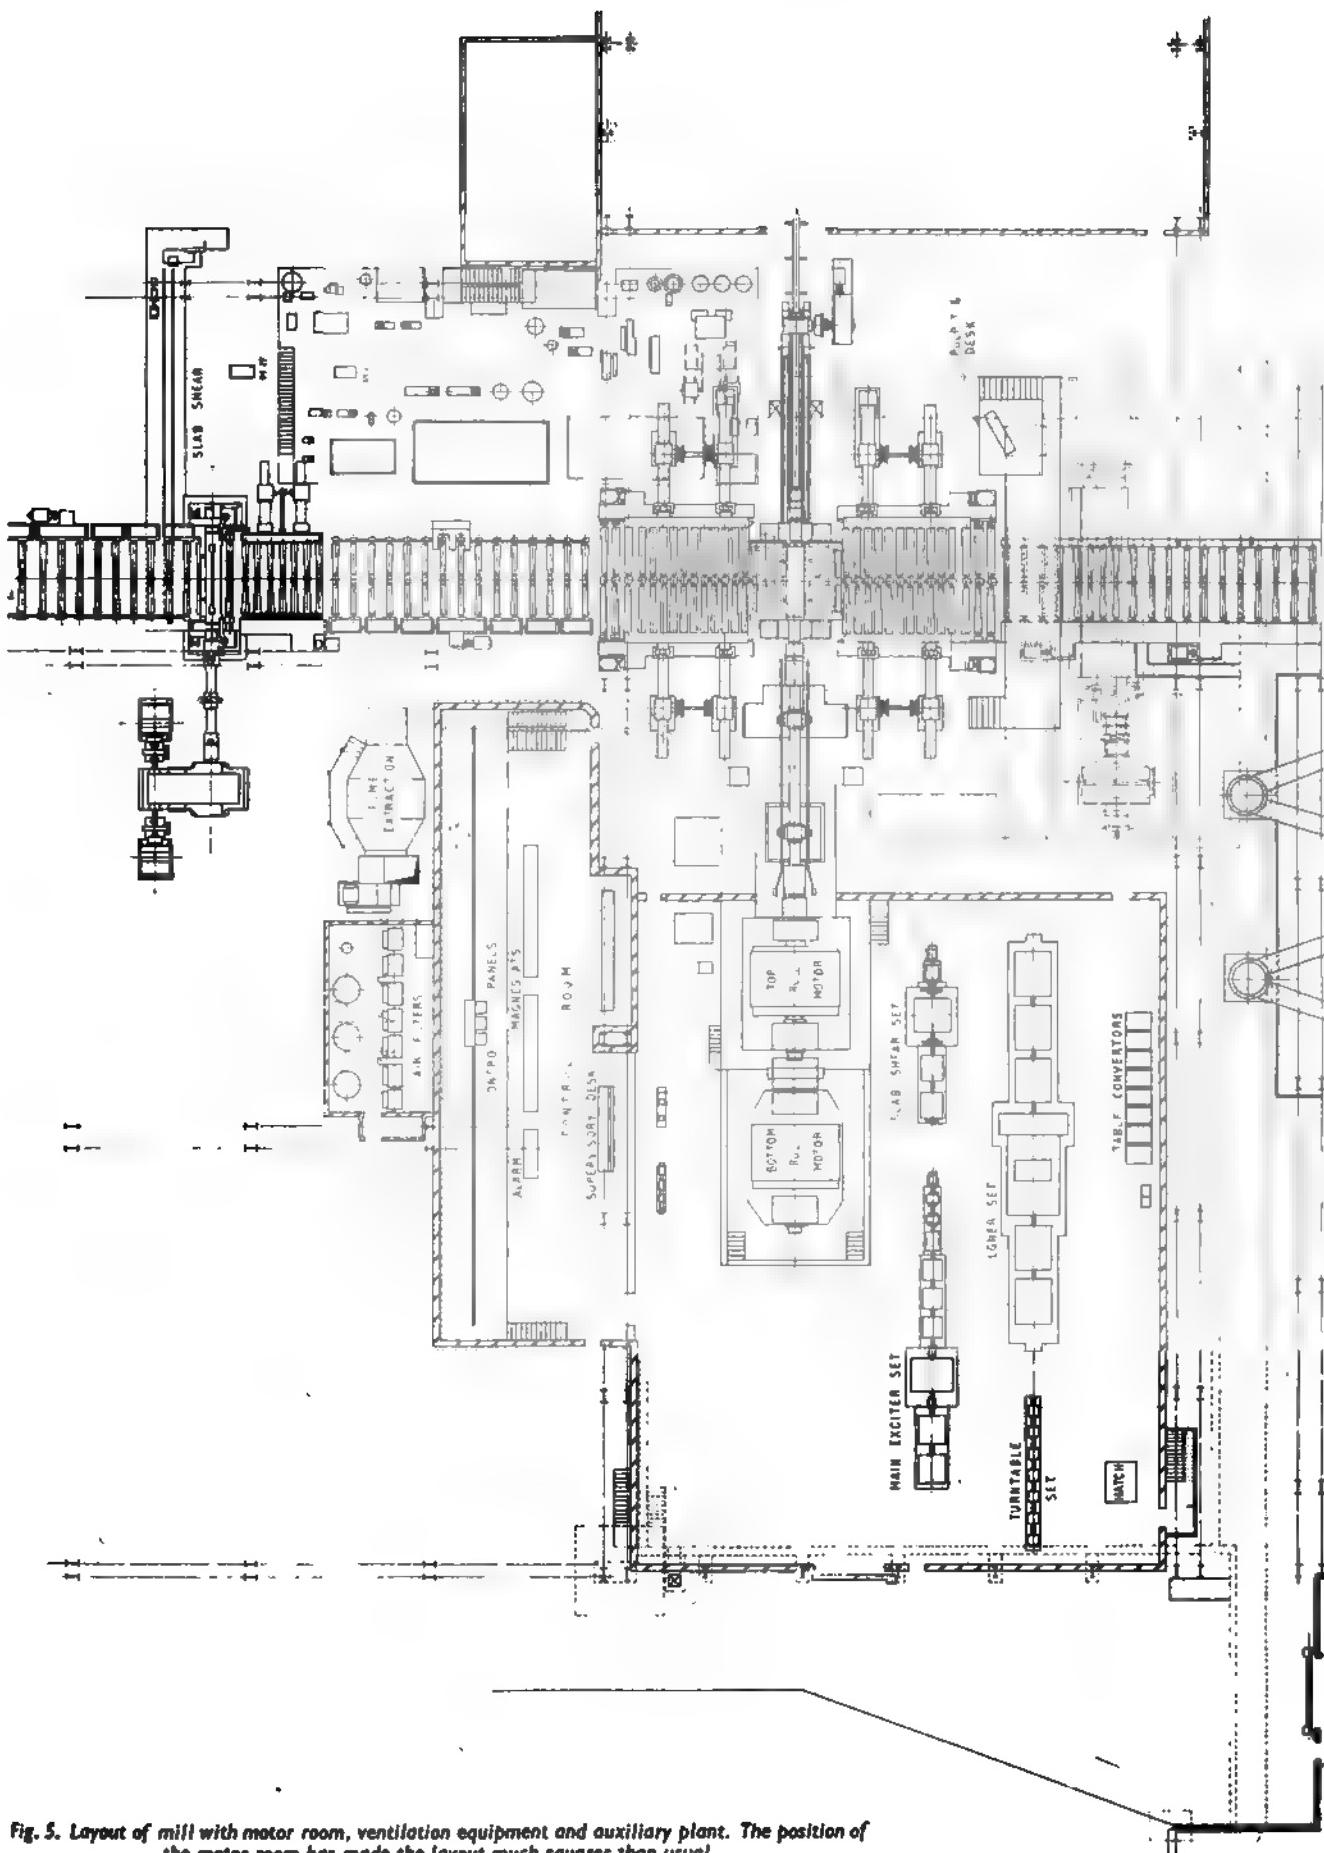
Layout of mill with motor room, ventilation equipment and auxiliary plant. The position of the motor room has made the layout much squarer than usual
